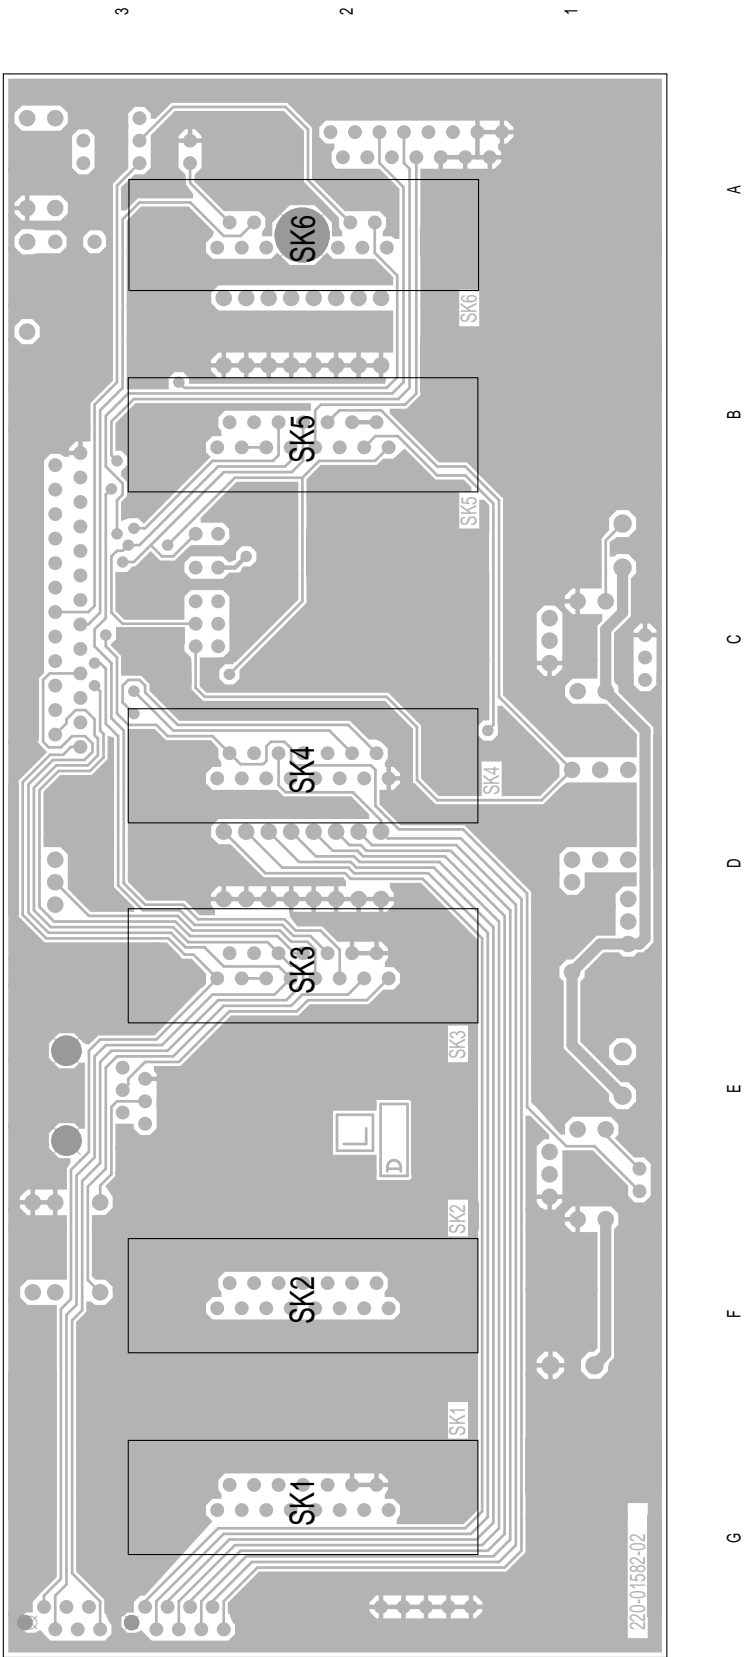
T800-55-0000 PCB Layout - Bottom Side (Inner)
